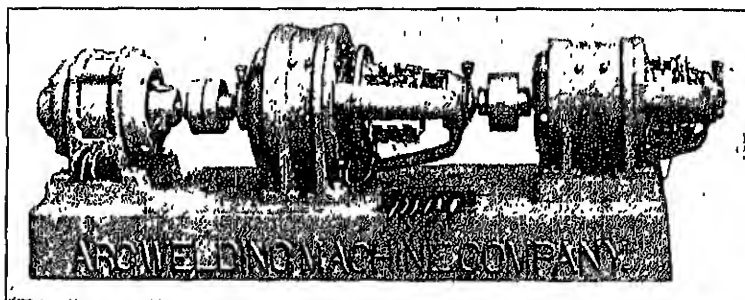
A.—The Arc Welding Machine Co.'s Outfit.
